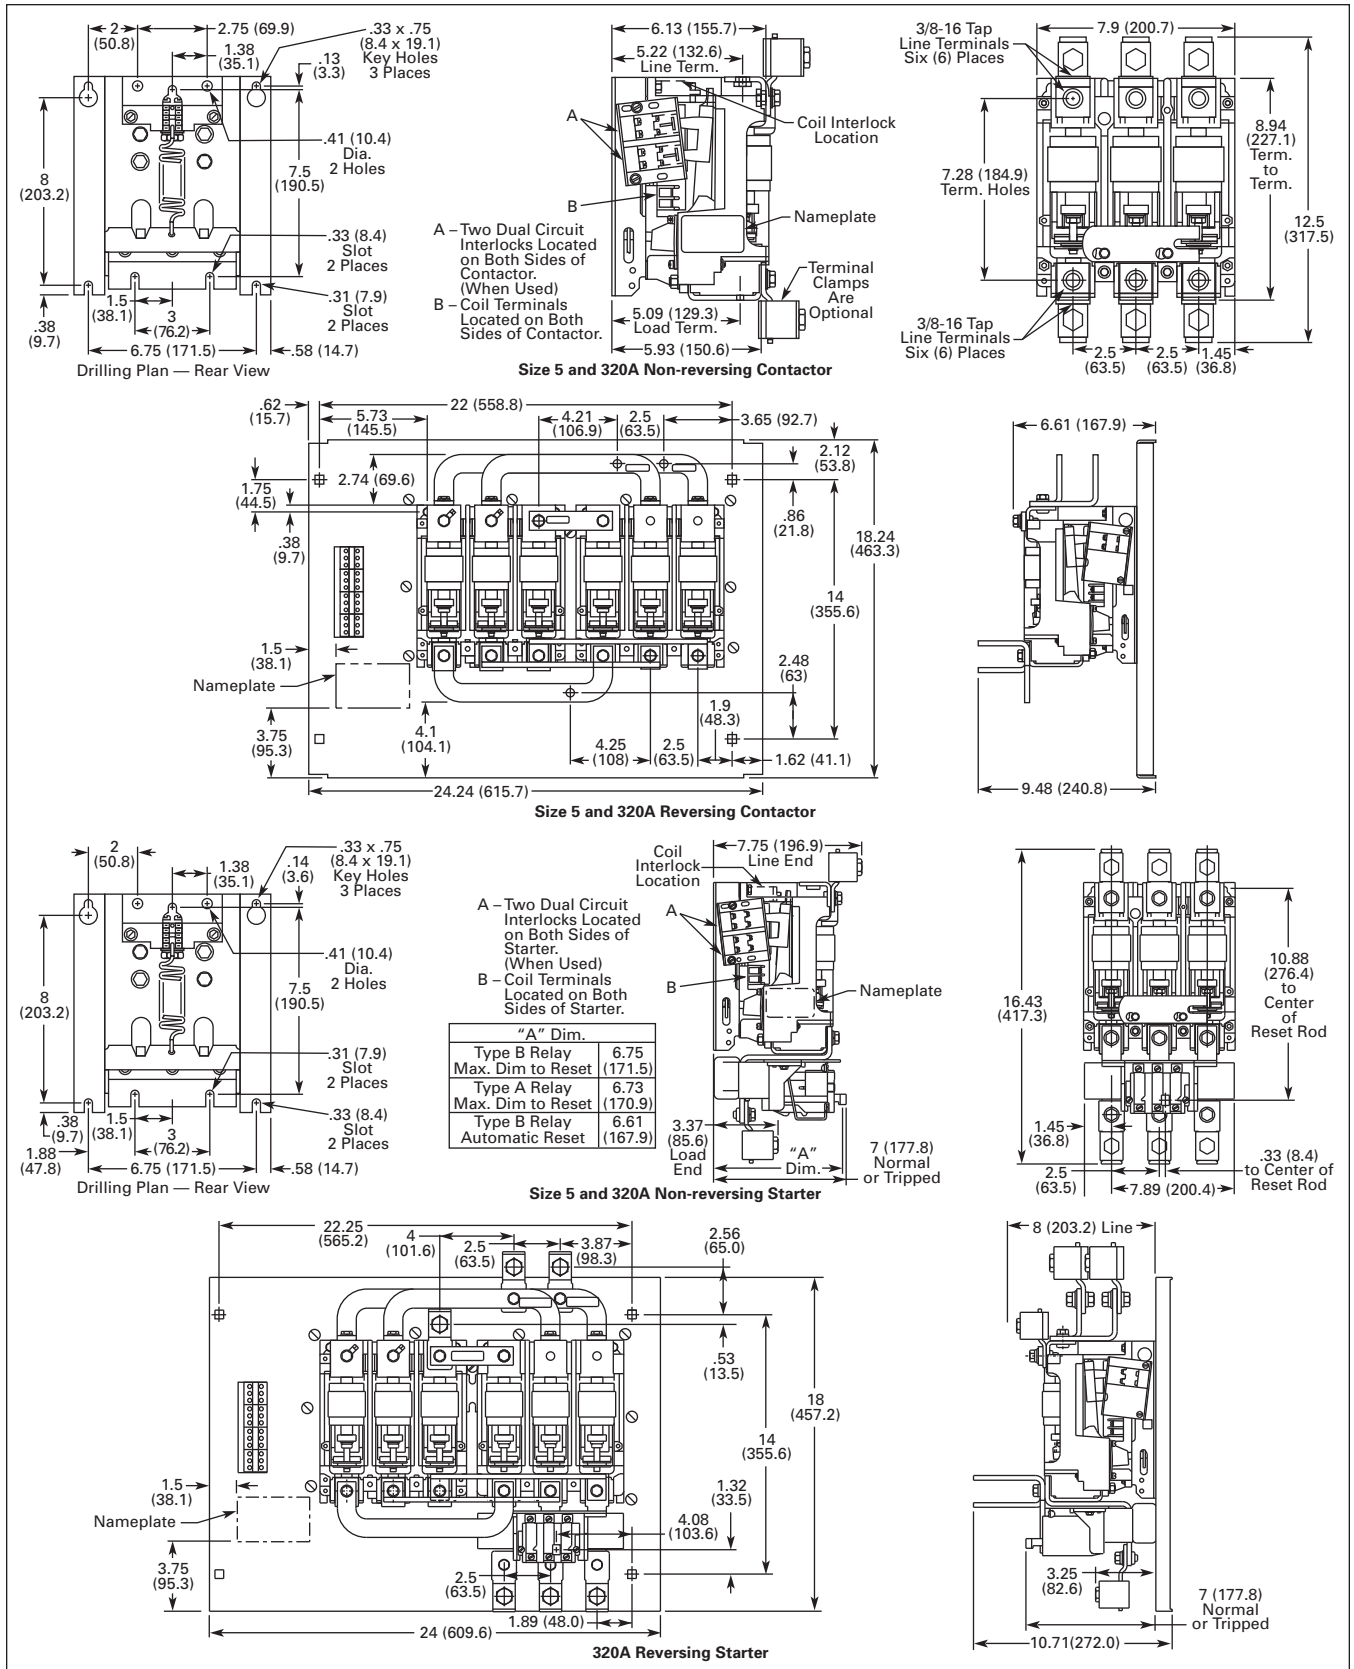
Open Type Contactors and Starters — Size 5 and 320A — Approximate Dimensions in Inches (mm)
